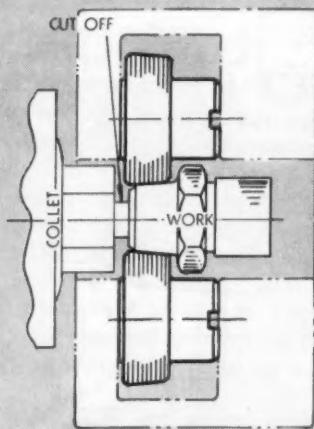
Rolling taper pipe threads behind a shoulder on the collet end of a workpiece.
